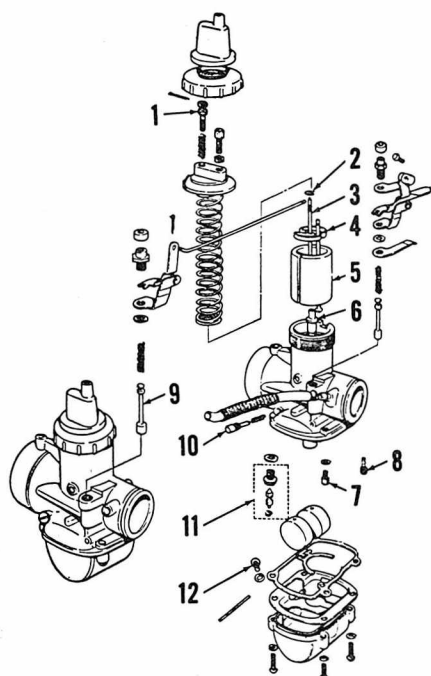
Exploded view of carburetor used on 500 Suzuki.
